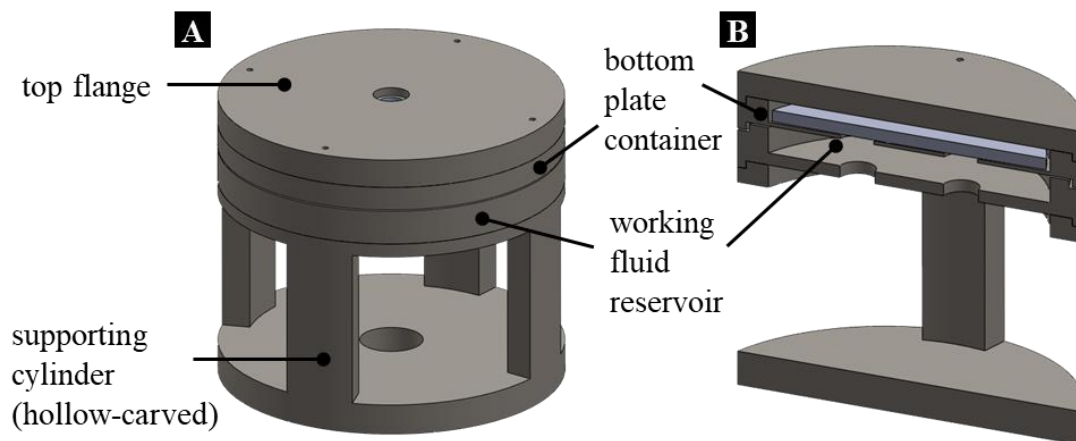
Bioreactor case assembly in A.) overview; B.) cross-sectional view
